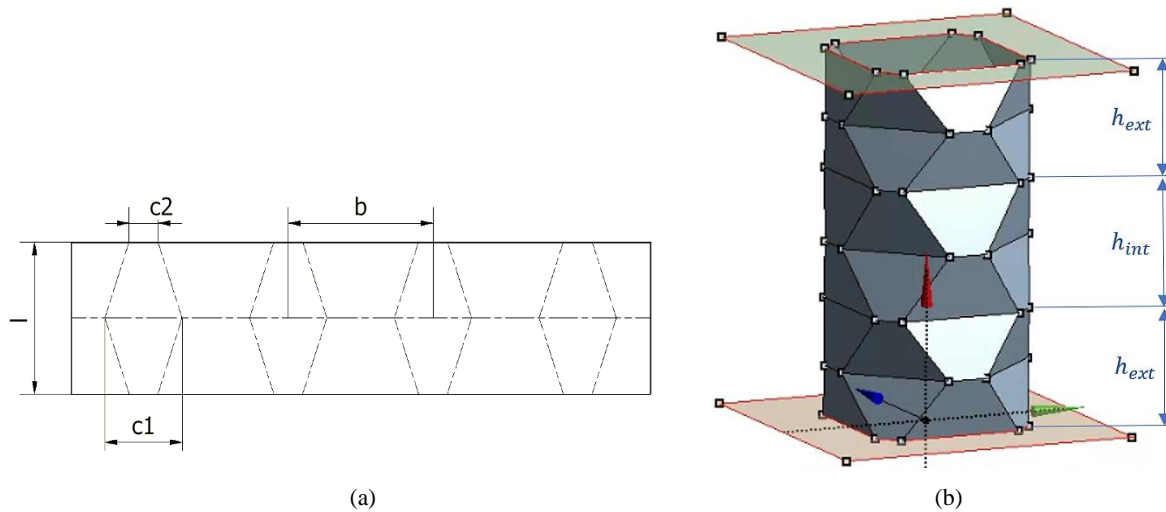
Parametric geometry: (a) folding lines on flat sheet, (b) folded origami tube
